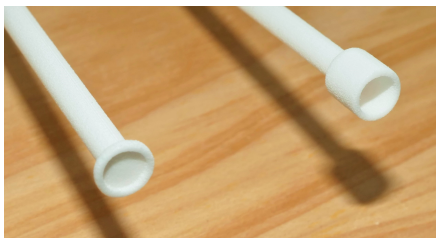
Sticks socket for a F5 magnet before and after modification of its dimensions: the initial stick had a socket of 5 mm in depth (right) and it was reduced to 1 mm in depth (left).
